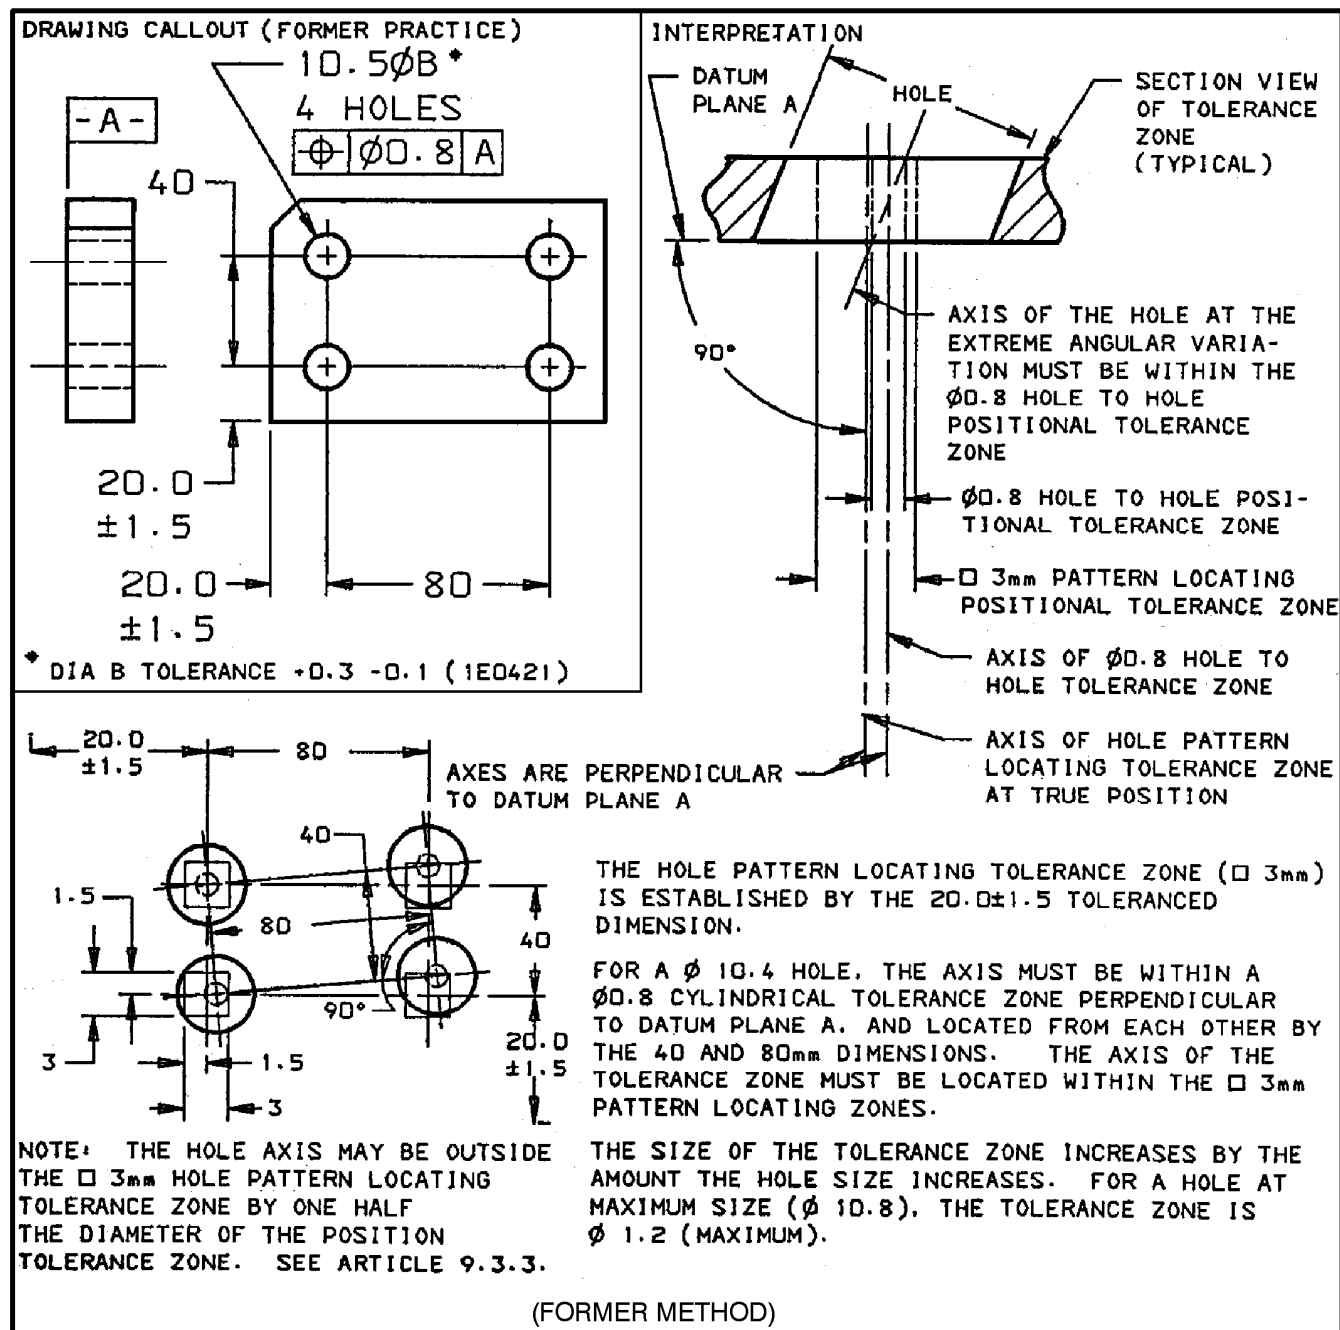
Combination Positional Tolerancing And Toleranced Locating Dimensions
